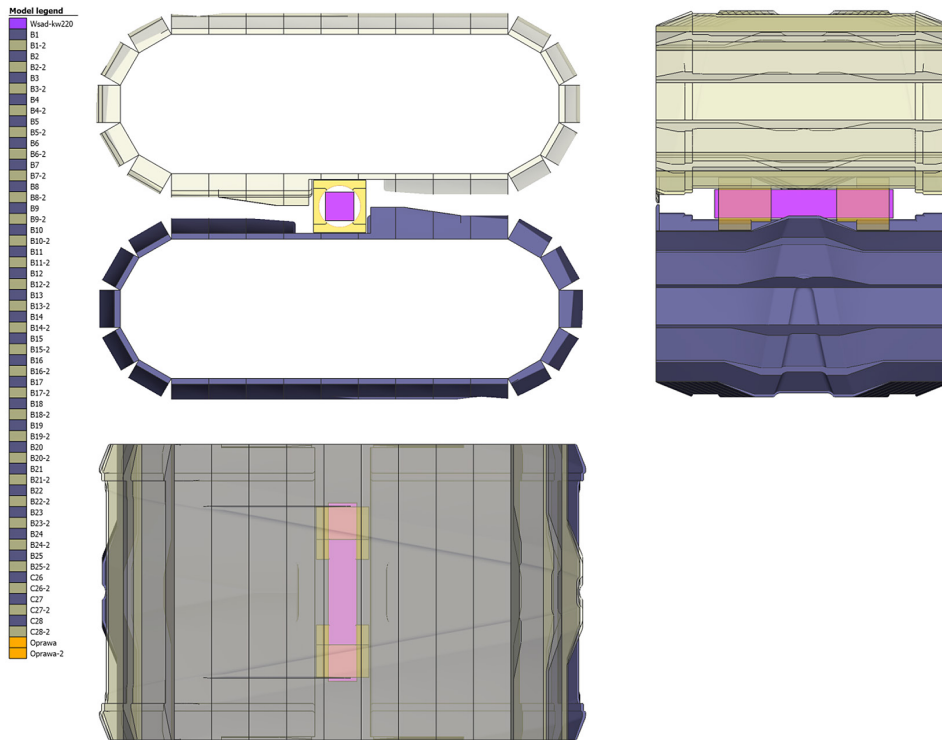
Geometrical model of a CWR process in which a railcar axle is formed from a rectangular billet
